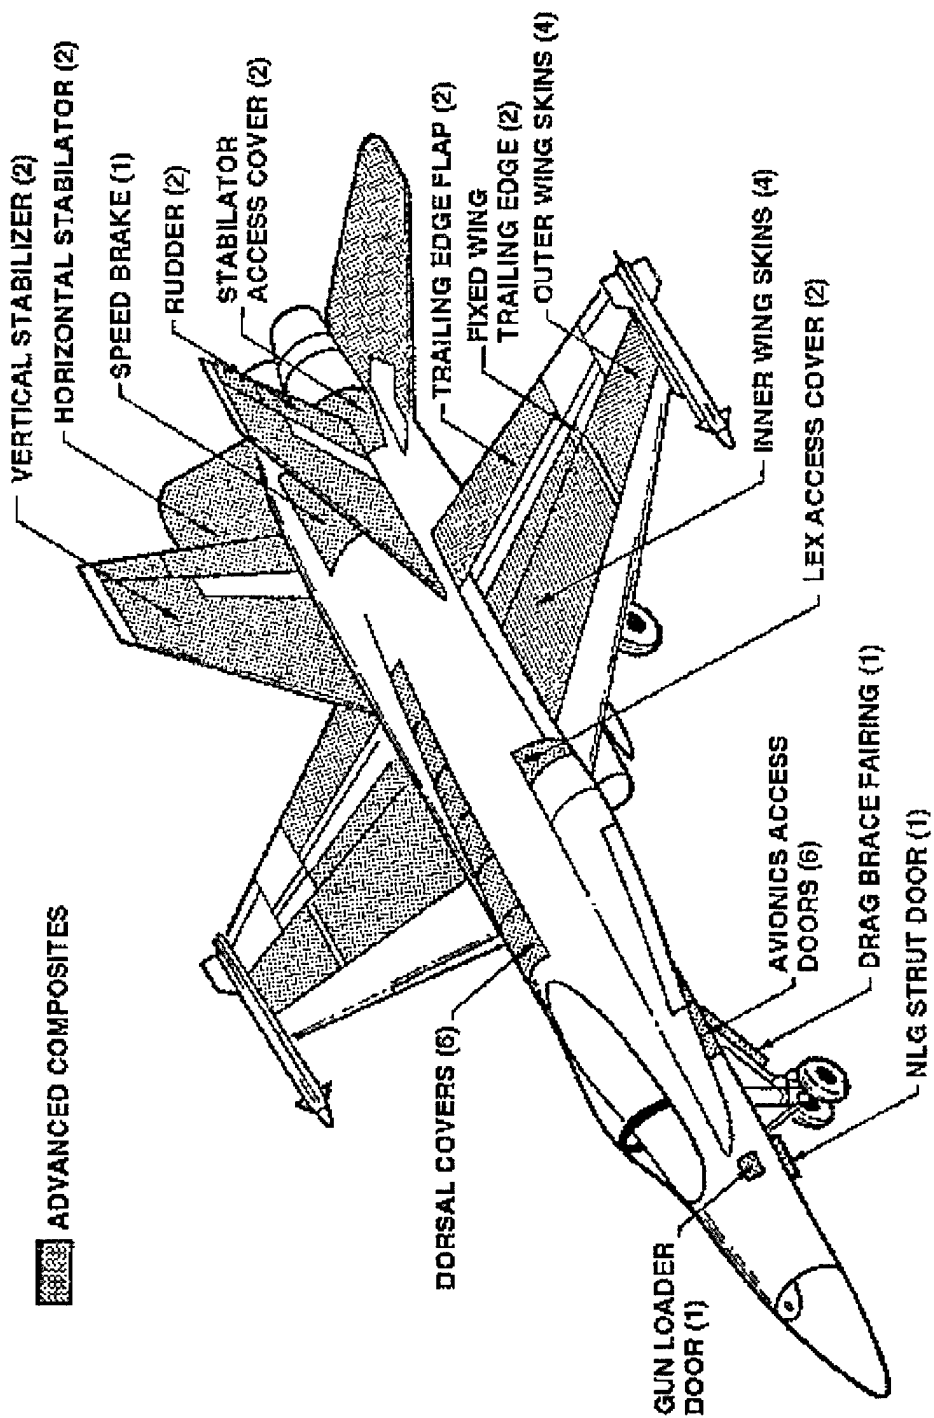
F-18 MAJOR COMPONENT DRAWING
